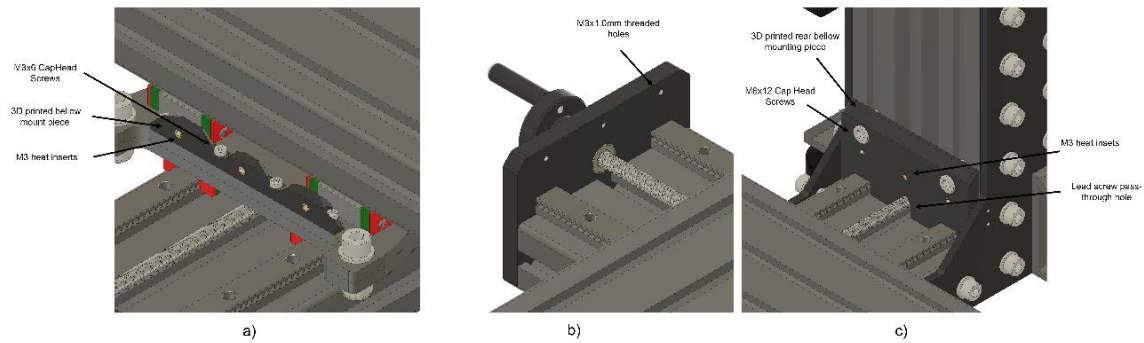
a) XY Gantry plate 3D printed part for mounting the bellows, M3x1.0 threaded holes were added to the plates to secure the printed part, then by adding M3 threaded heat inserts to the printed part, the user can easily remove the bellows for maintenance. b) Front Y plate with the added M3x0.5 threaded holes to mount the bellow in the front. c) Z tower printed part to secure the bellows in the Z tower while clearing the lead screw and having the M3 heat inserts.
